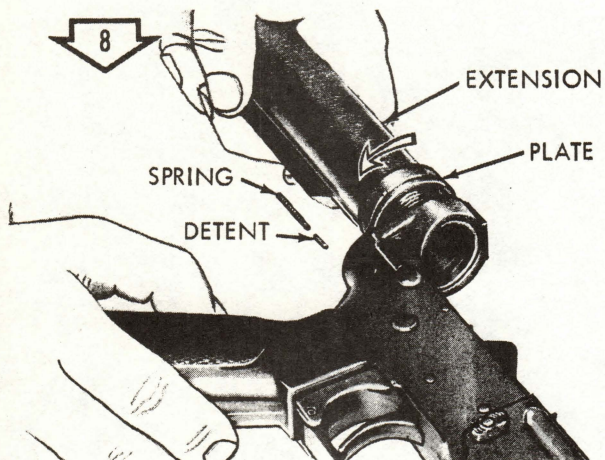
Disassembly/Assembly of Submachine Gun. (Page 1 of 3)
